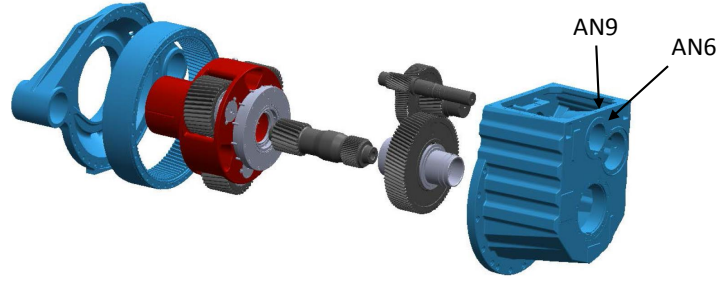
Wind turbine gearbox components, reproduced from [Sheng, 2012]
